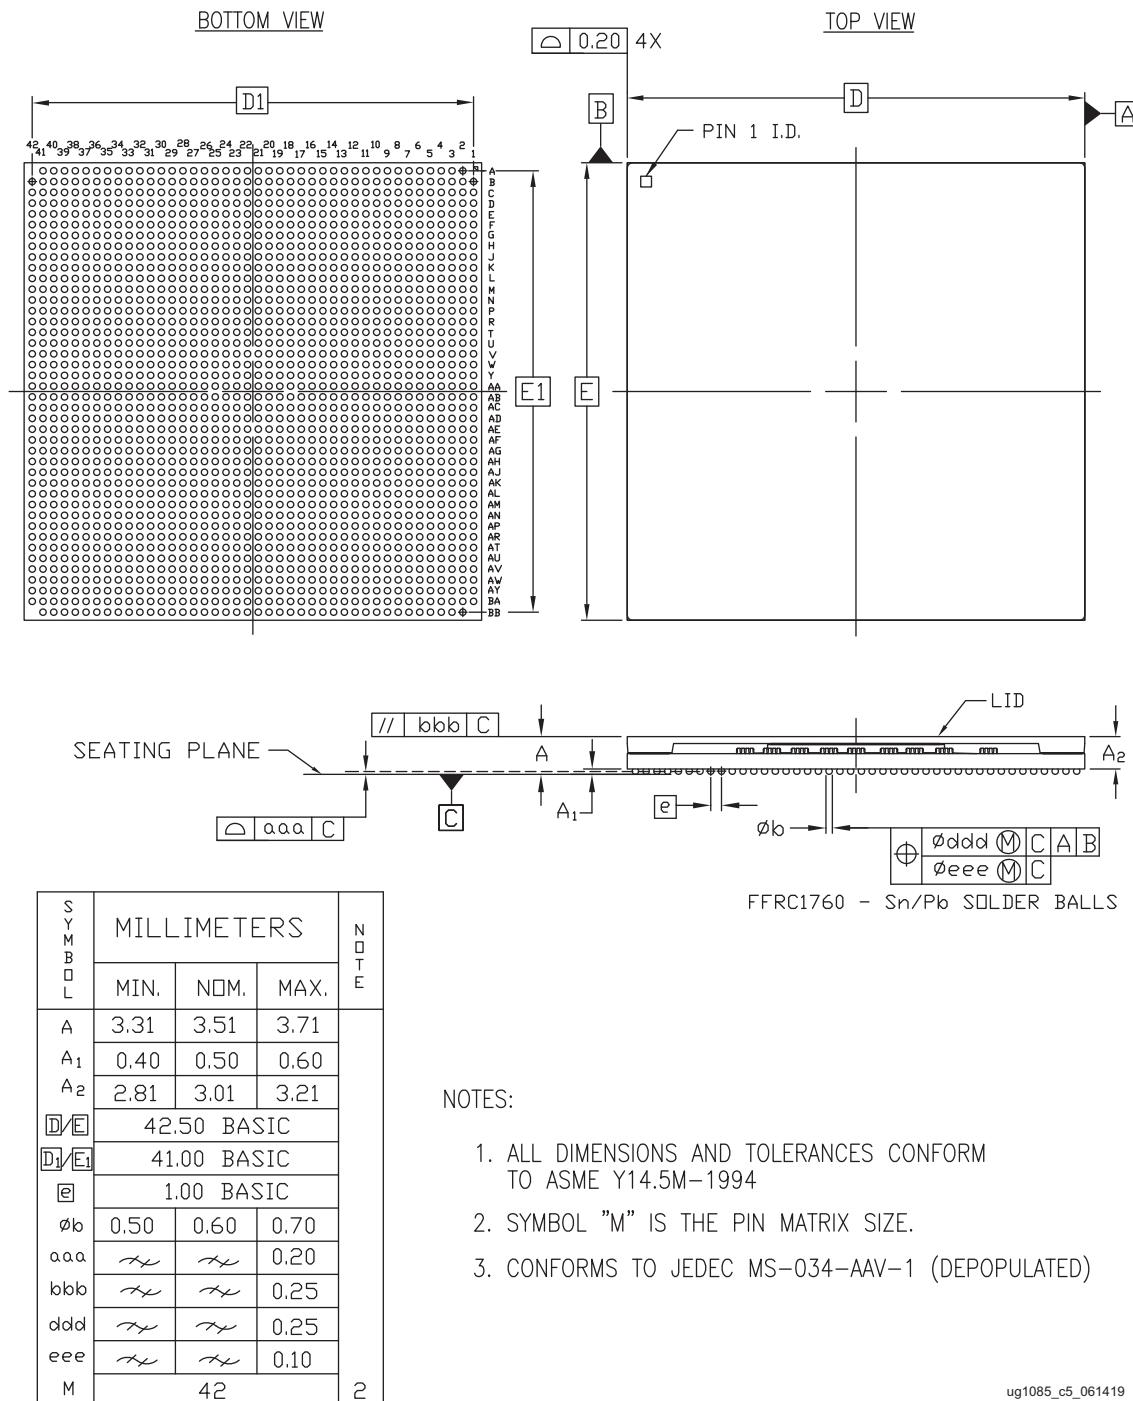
Package Dimensions for FFRC1760 (XQZU11EG and XQZU19EG)
